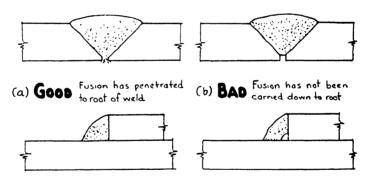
Examples of butt and fillet joint welds, cross-sectioned
